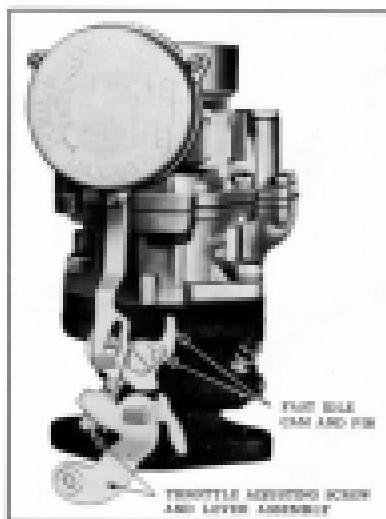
Slow and Fast Idle—Engine Hot or Cold—Choke Open.
